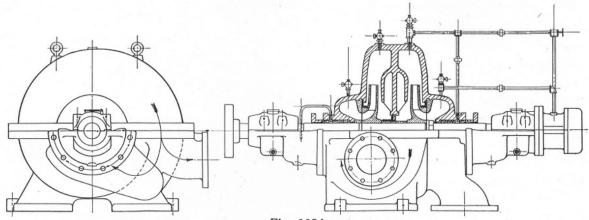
Sectional View of 2 Stage Class "R" Pump
